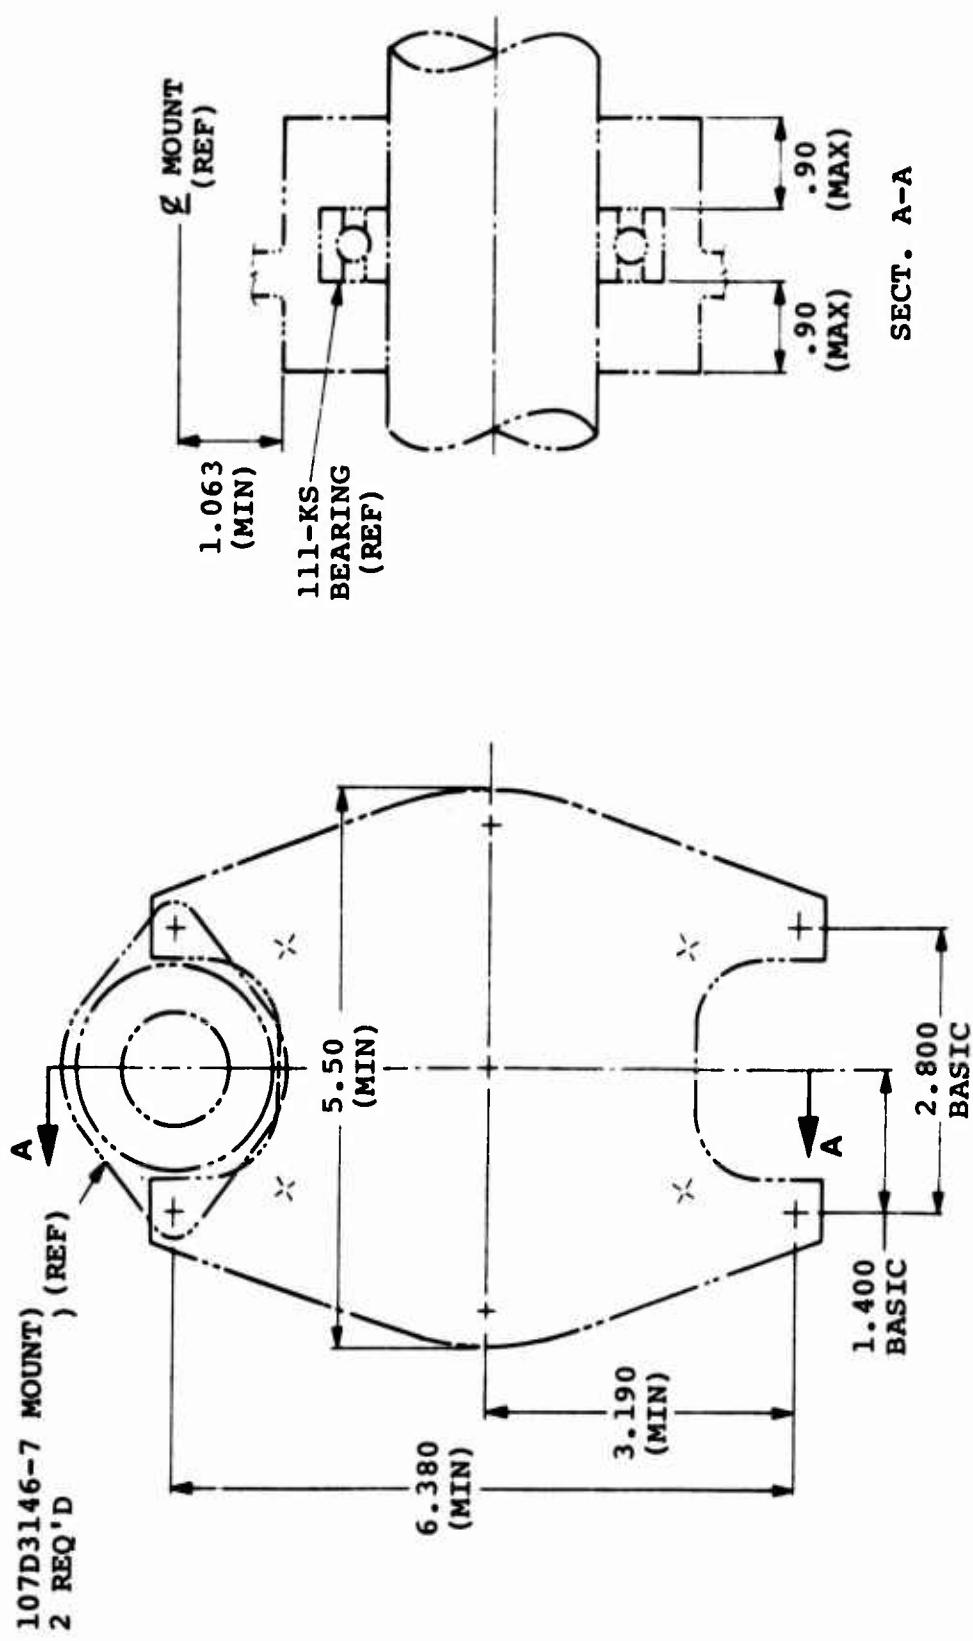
Bearing Housing Envelope Dimensions for HLH Engine Shaft Support Bearing Development Test (SK301-10291).
